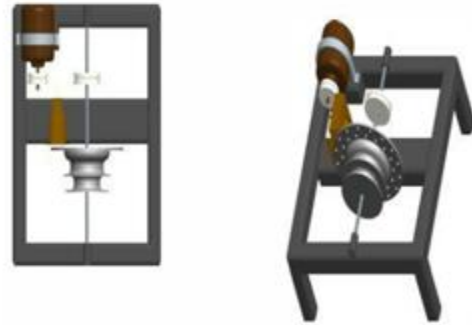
Assembly Drawing of Electromagnetic Braking system
